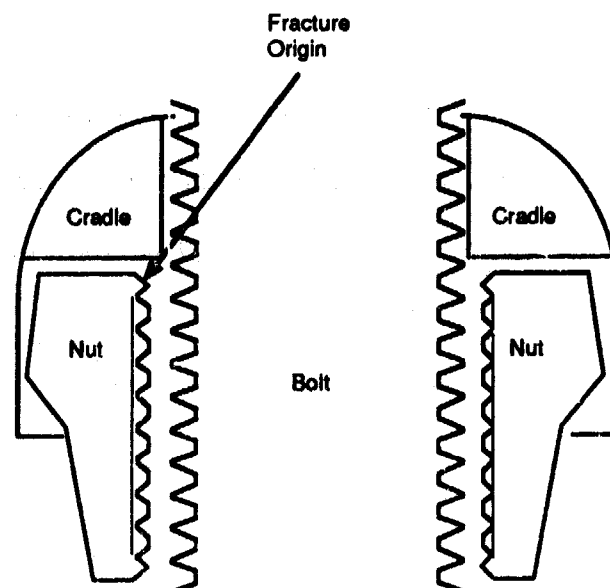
Cut-away section of the barrel nut, bolt and cradle showing the fracture origin observed on all three service failures.
